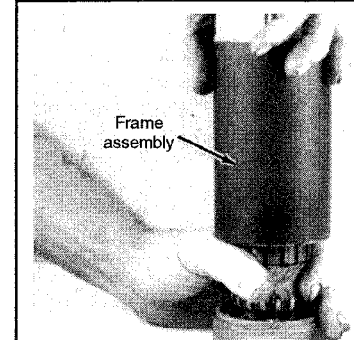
then carefully slide the starter housing over the assembly (remember the magnets will pull strongly)
